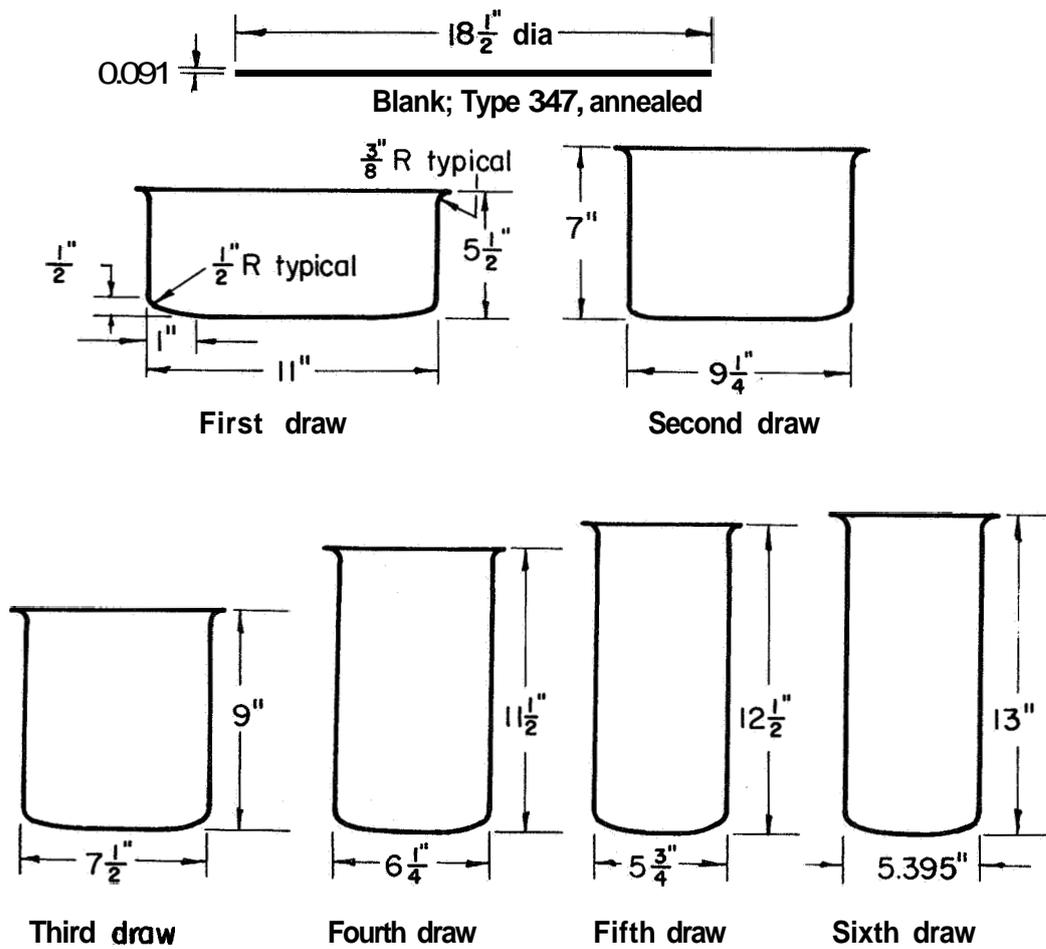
DRAW REDUCTIONS FOR A DEEP STAINLESS STEEL SHELL (Ref. 79)
